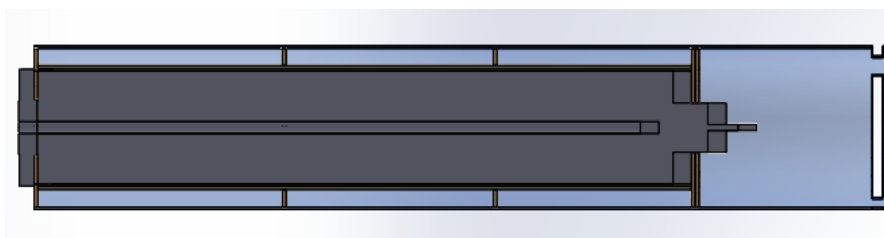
Motor mount configuration in bottom rocket body, including mock engine flipped sideways.
